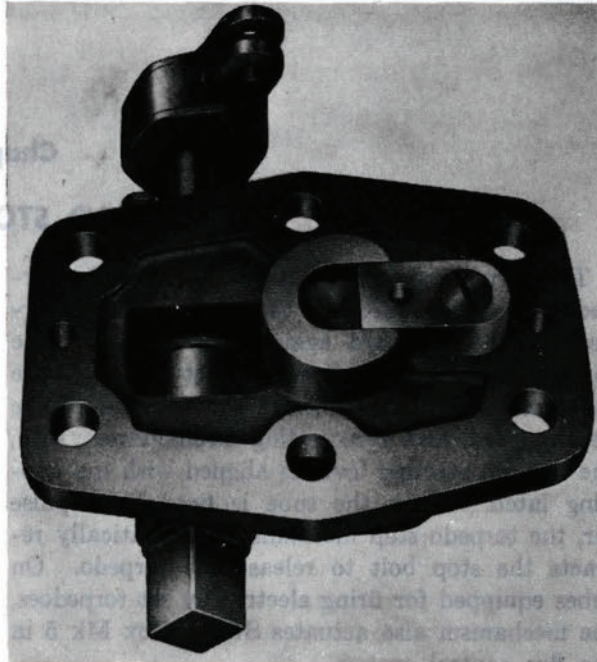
Stop Bolt Housing Assembly—Bottom View—Stop Bolt Up.
